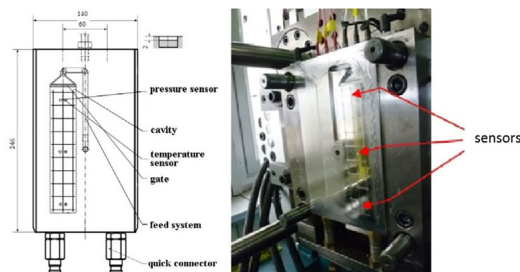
The single-cavity mold with pressure sensors: a) scheme of the injection mold, b) the mold mounted in the injection molding machine.
